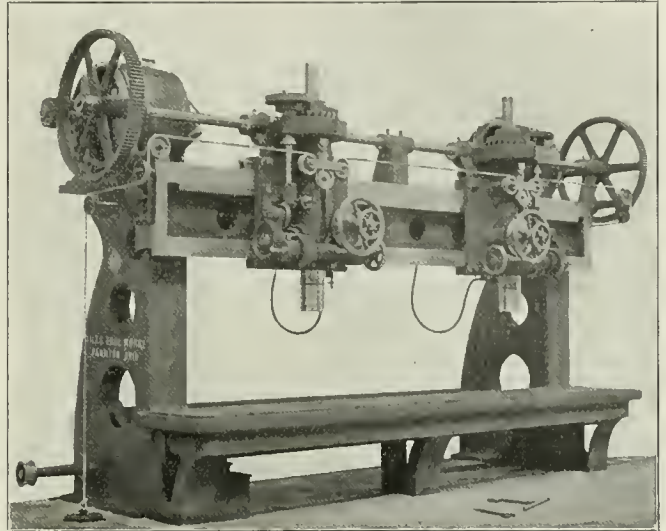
Niles-Bement-Pond Locomotive Rod Boring Machine.
